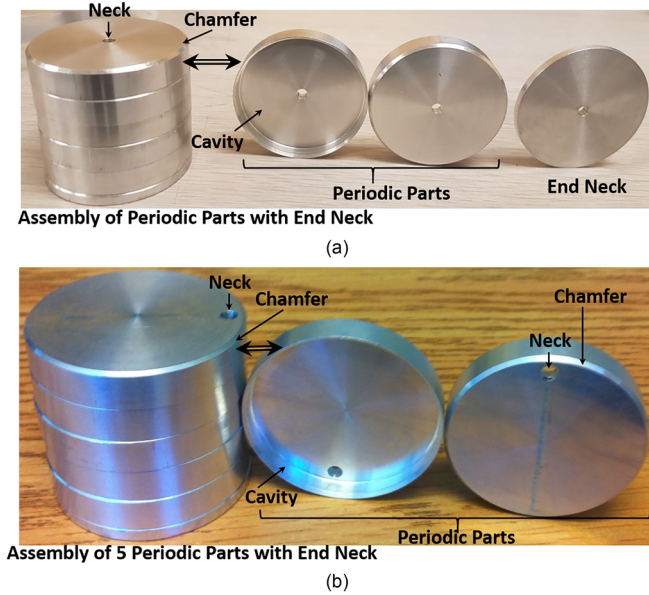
(Color online) Photos of the manufactured parts and assemblies of the prototypes, showing the metamaterials with a centered neck (top) and off-centered neck (bottom).
